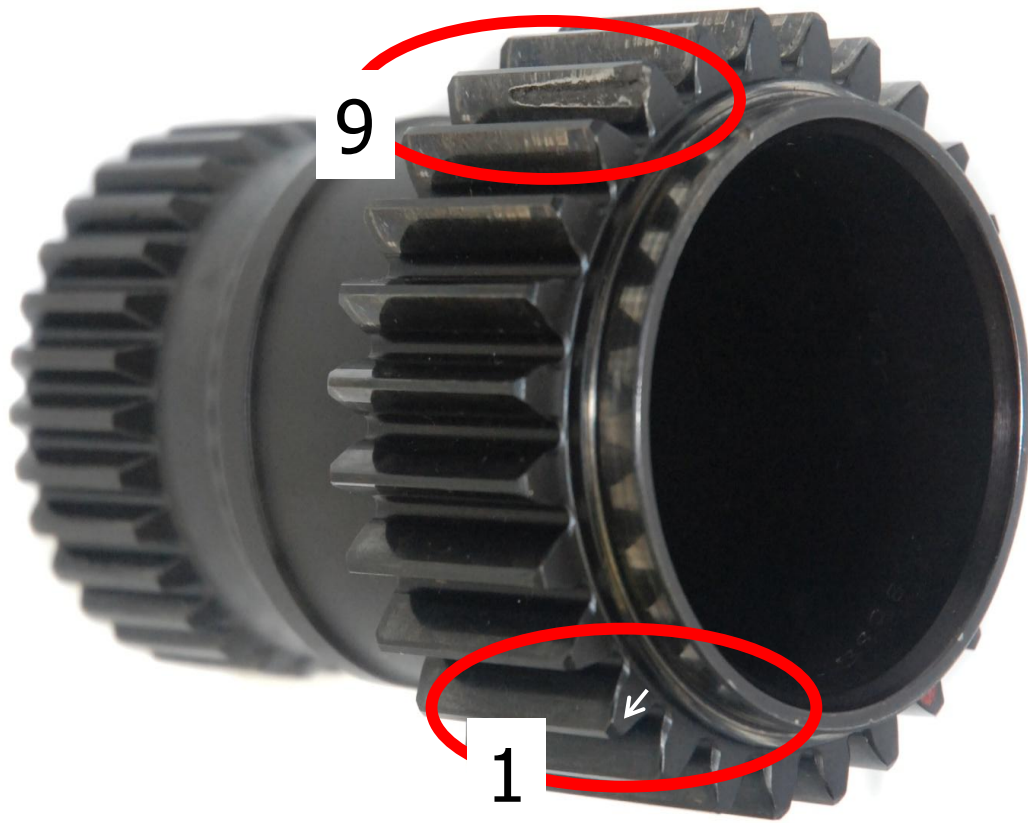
Sun Gear: Spalled Sun Gear Case - B12-3993
